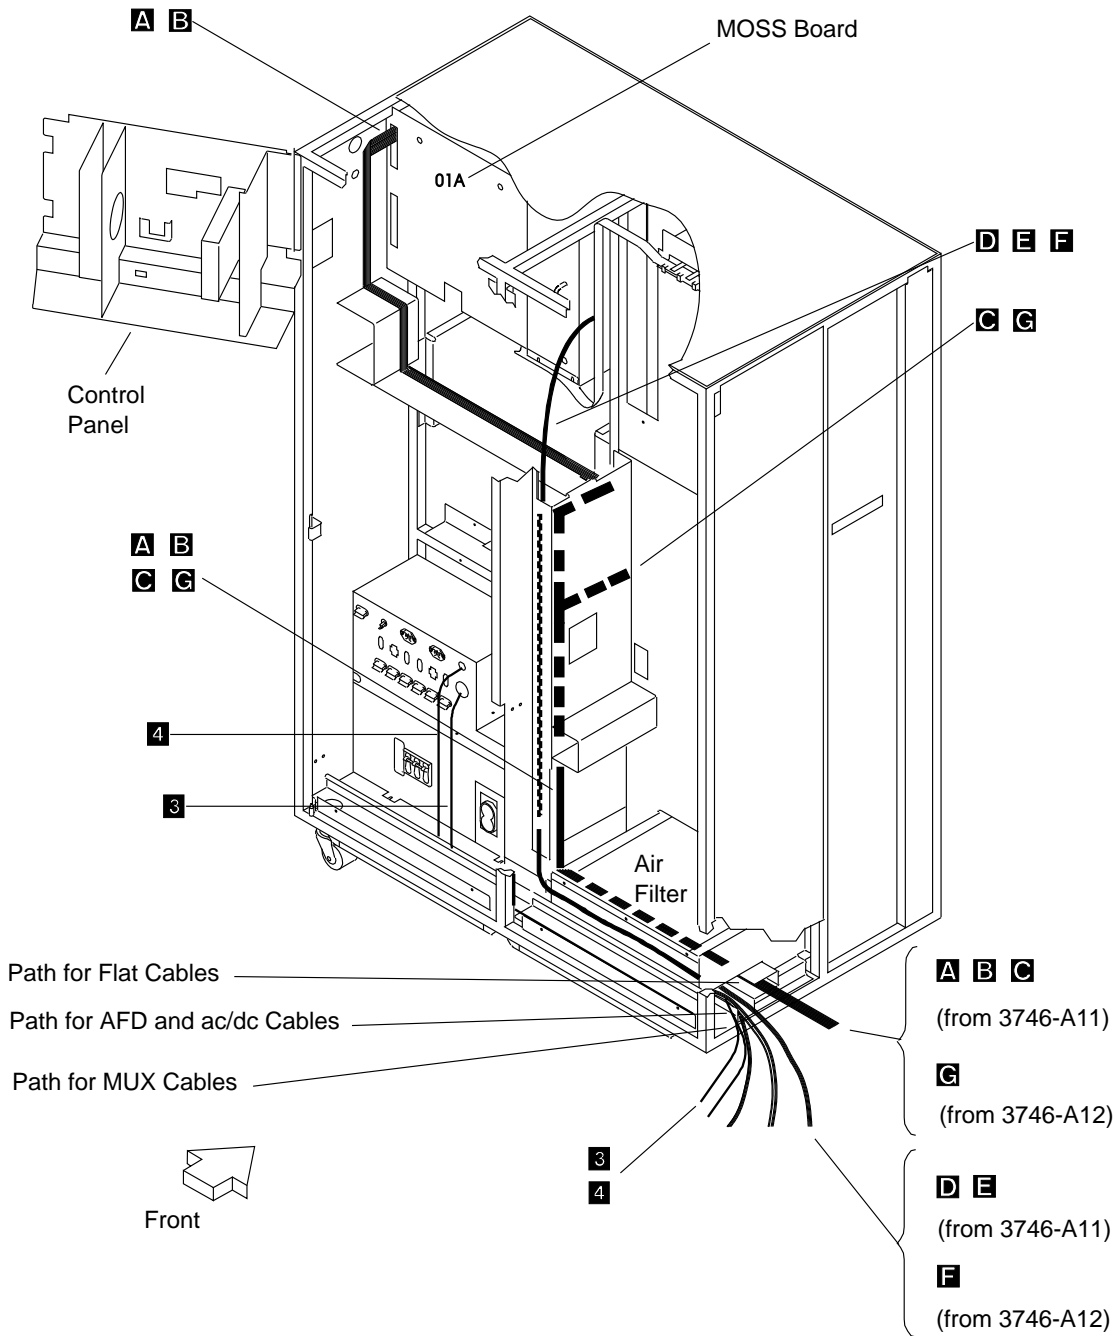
Cable Path from 3746-A Units to MOSS Board (3745 Front View)
